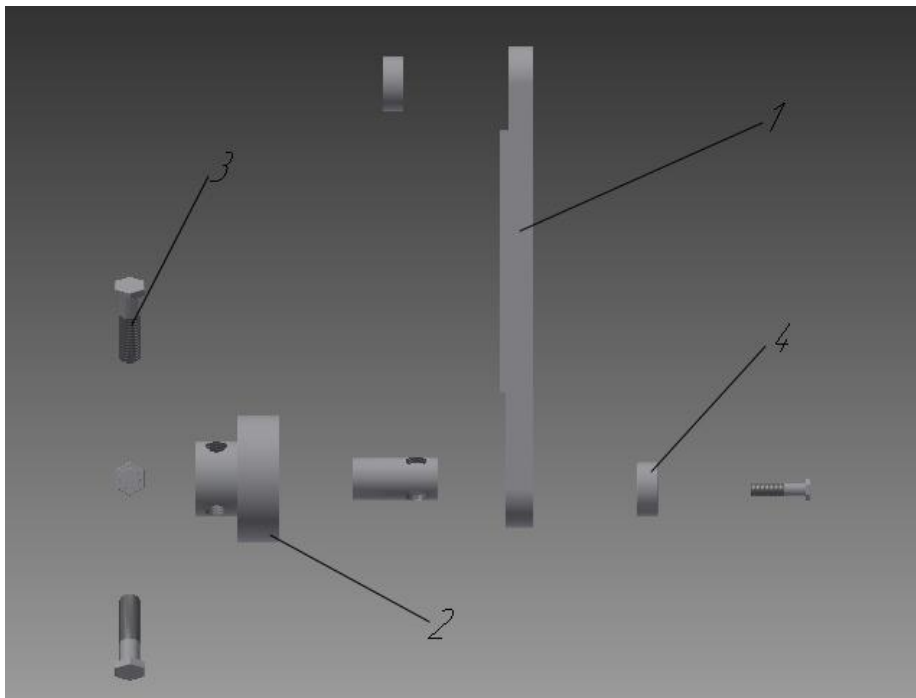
3D “Solid Works” images of some components of the machine for the biaxial cyclical loading: 1) connecting rod; 2) flywheel; 3) fixed screws; 4) ball bearing.
